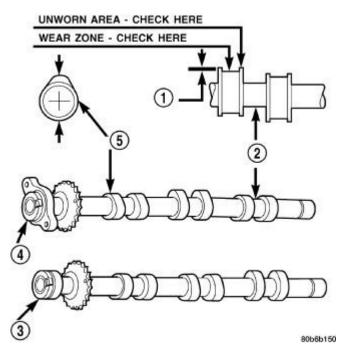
Camshaft Inspection Courtesy of CHRYSLER LLC
